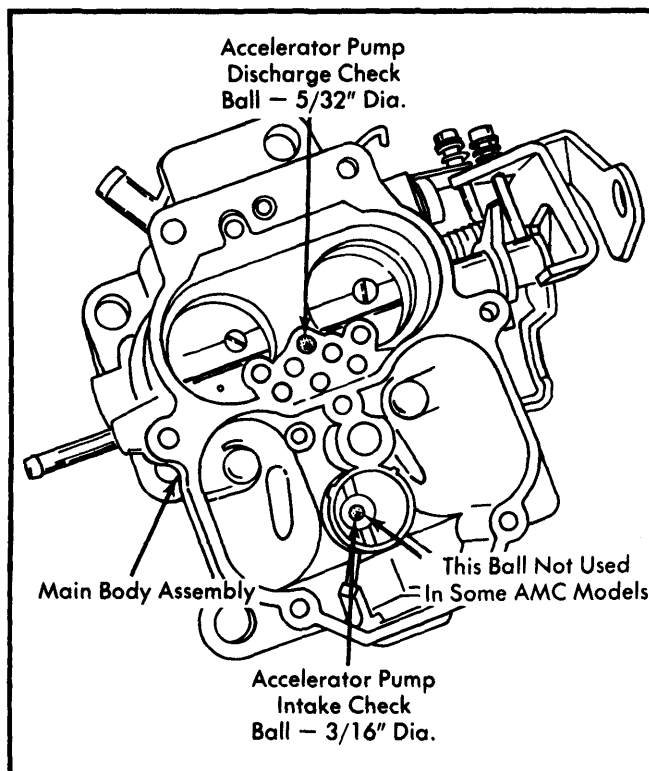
Top View of Main Body Showing Installation Locations of Large and Small Check Balls
